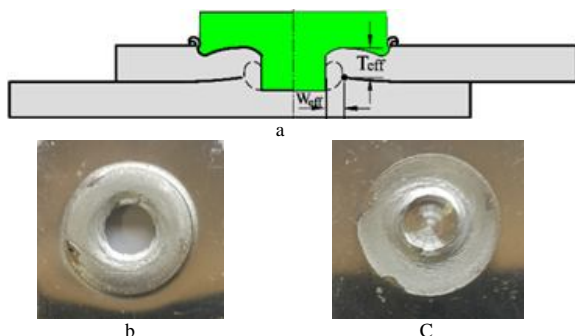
a) Schematic of joint section leading to shear failure mode b) bottom view of upper sheet c) top view of lower sheet
